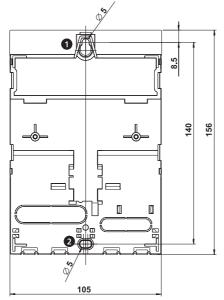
Rear side of the controller with the upper 1 and lower 2 mounting holes.
